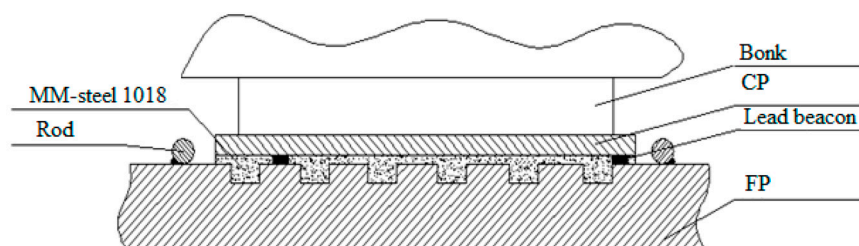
Scheme of installing a compensating plate on lead beacons in a space bounded by a welded rod (FP—fundament plate, CP—compensation plate).
